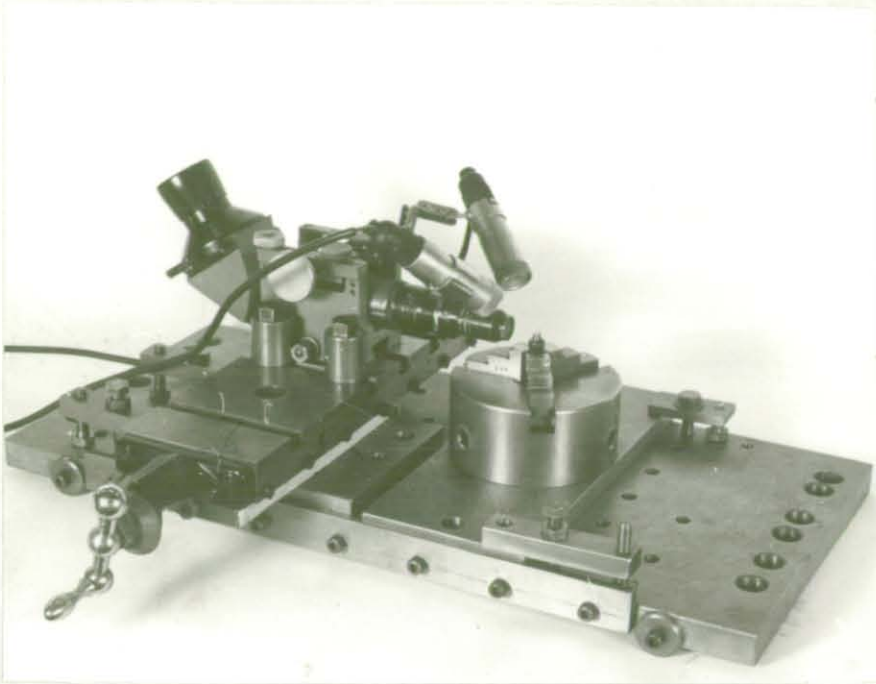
Arrangement for Measuring Wear on Cutting Tool
